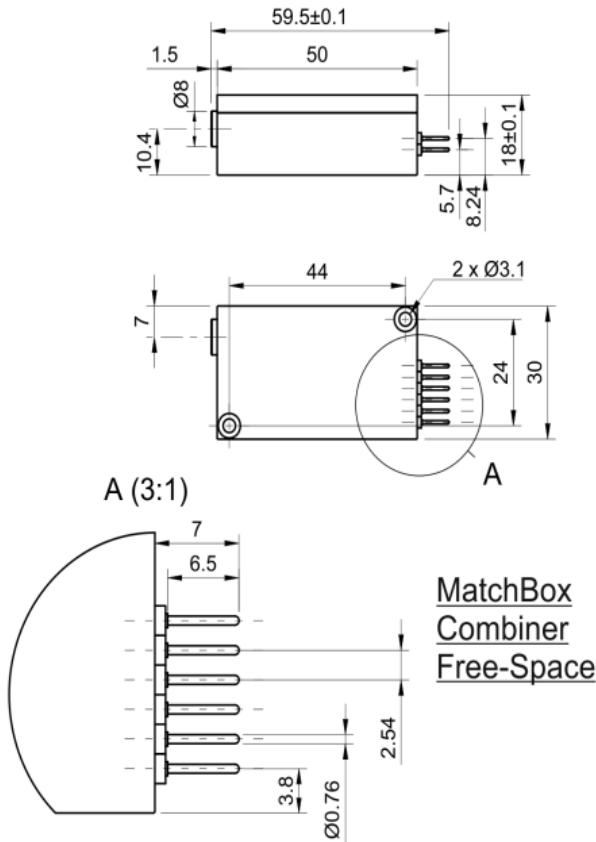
Top and side view drawing of wavelength combiner free-space laser.
